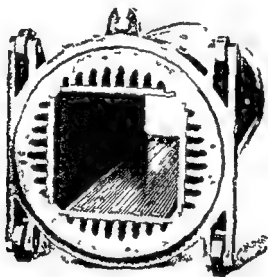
Square cage from cage press (Courtesy *The French Oil Mill Machinery Co.*)
